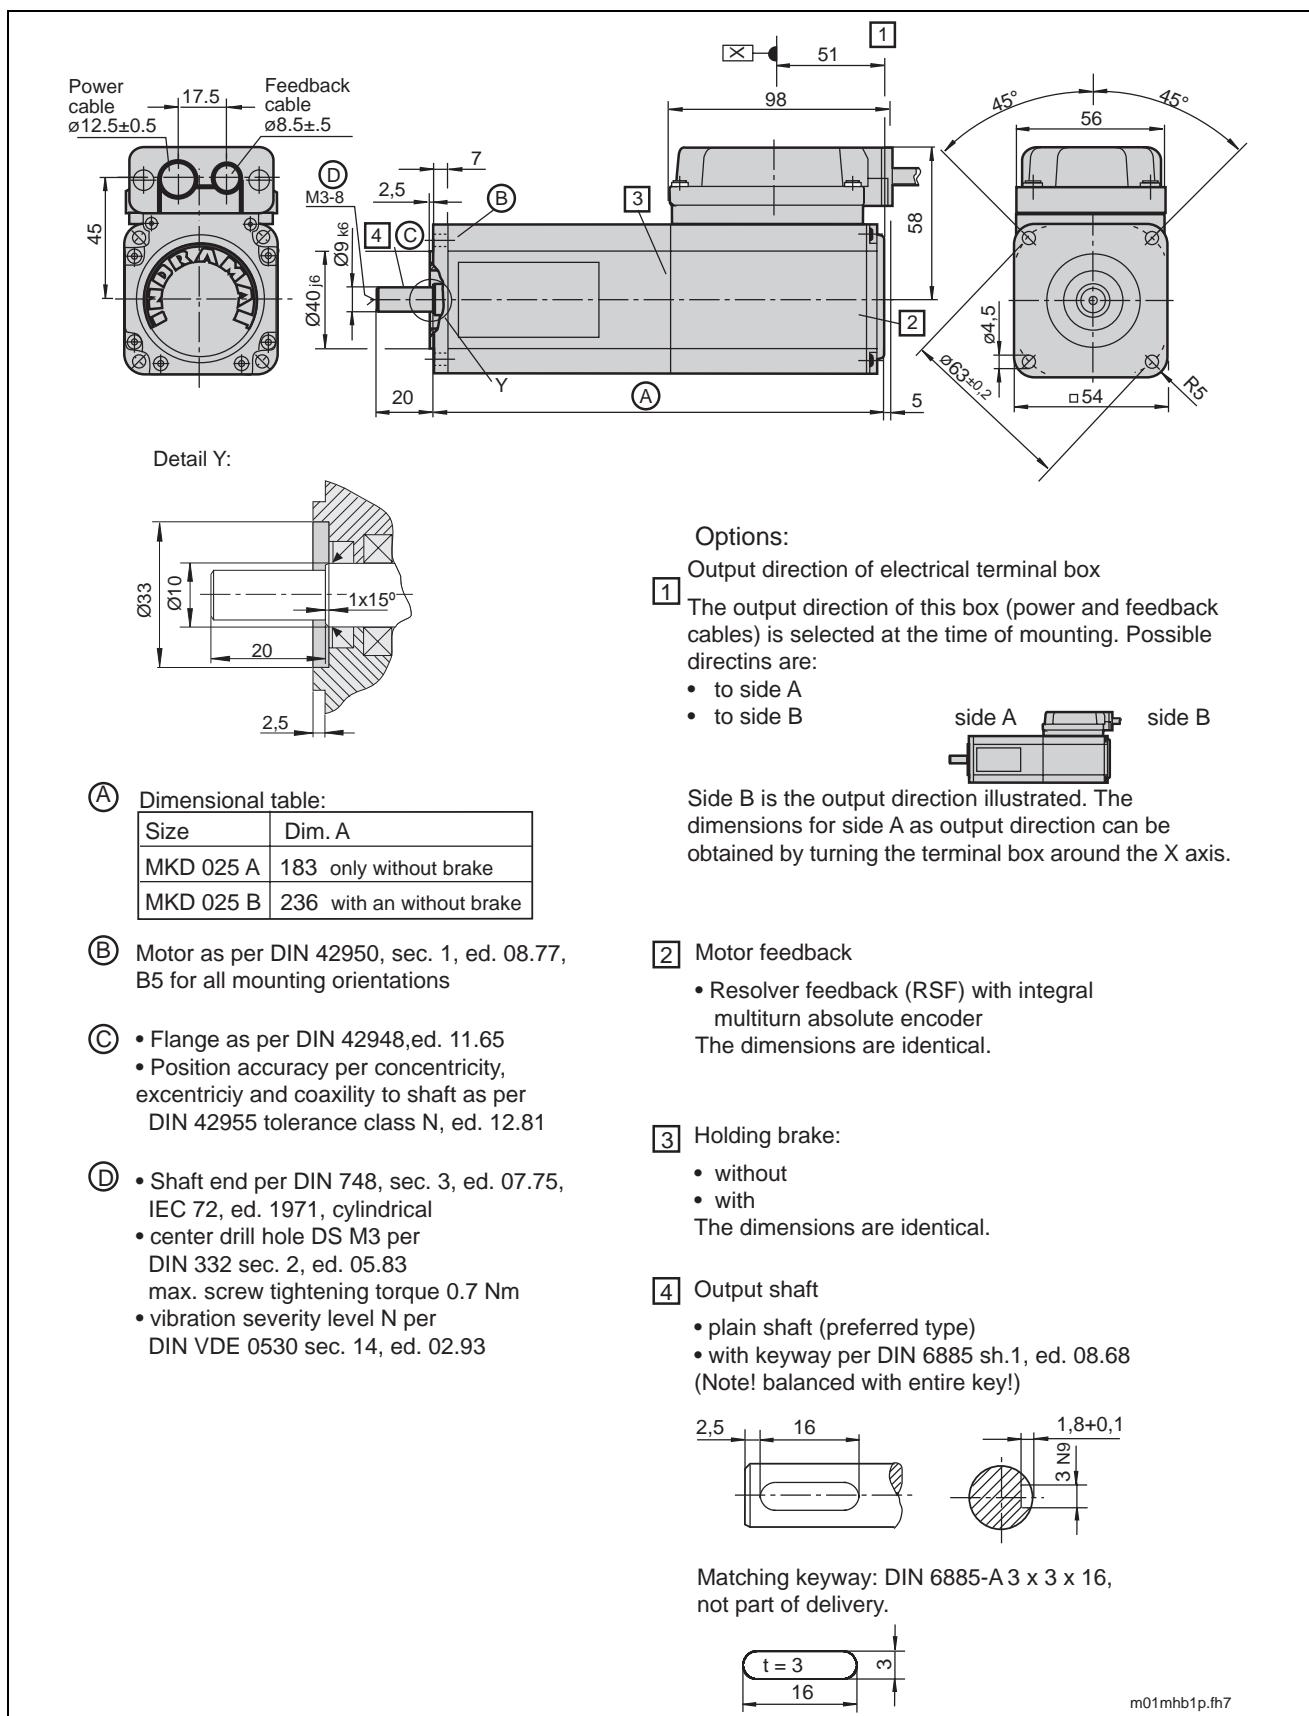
Dimensions sheet MKD025A, MKD025B
